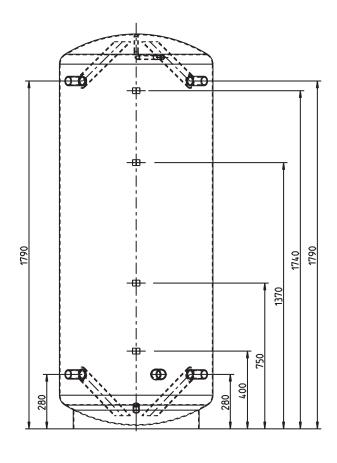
Dimensions Buffer vessel SE940 (raw part)
